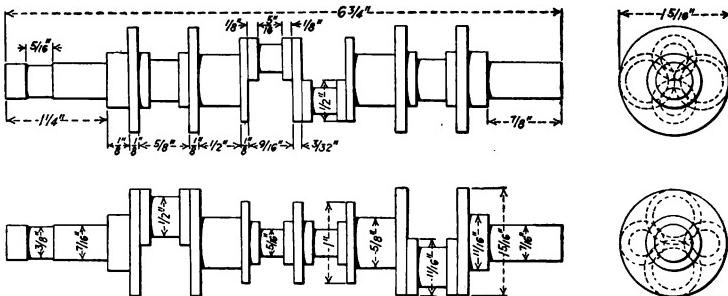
The dimensions of the crankshaft shown in Fig. 222
